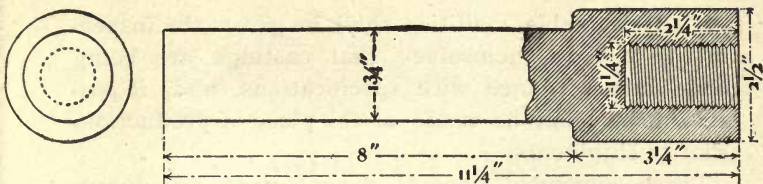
STEEL SOCKET FOR TENSILE TEST OF CAST IRON.
